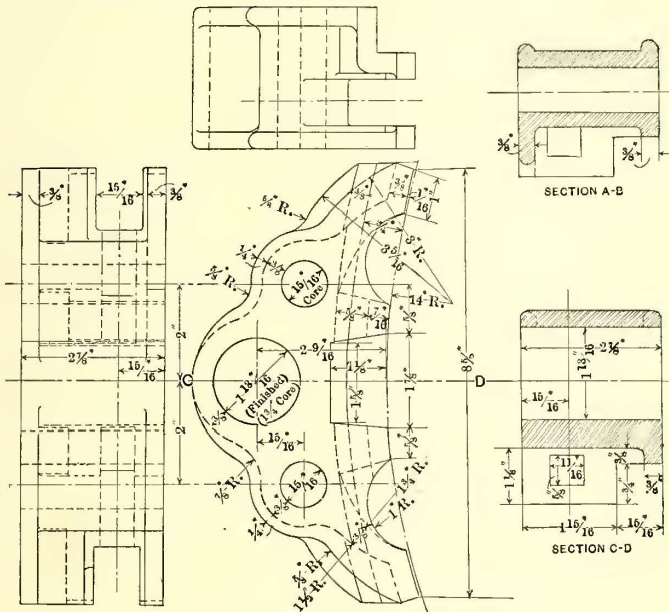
Brake-Shoe Head for Pony Wheels of Brill Maximum Traction Truck
